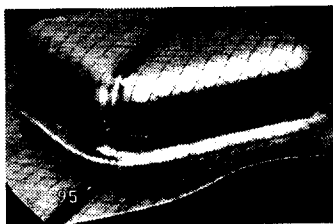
Fracture at the weld line of the tailored blank with same thickness. (Specimen DST, 0.79-0.79mm)
